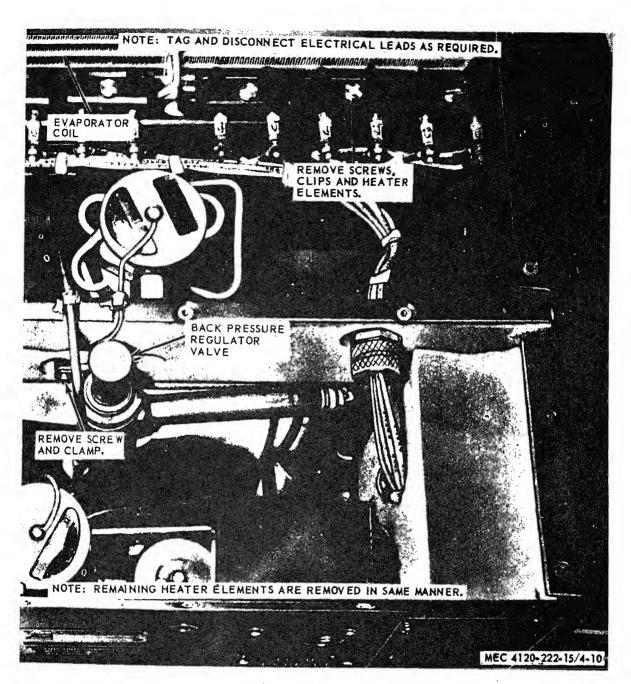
Electric heater elements and back pressure regulating valve removed and installation.
